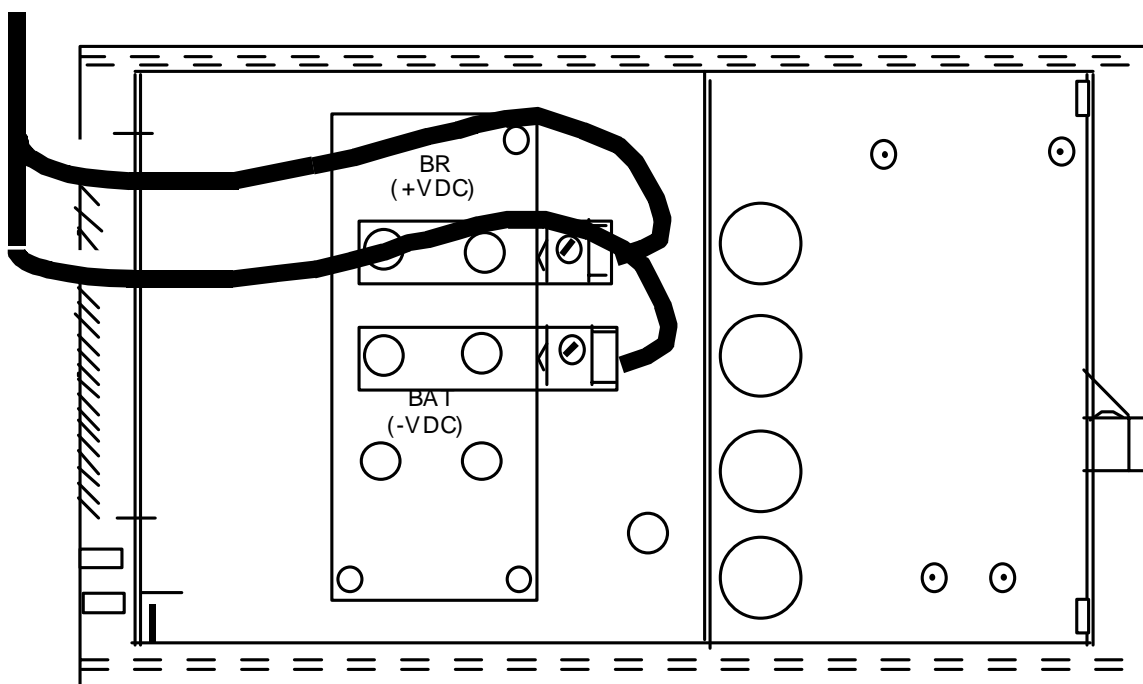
System or embedded shelf (right view) - DC connecting - side access
